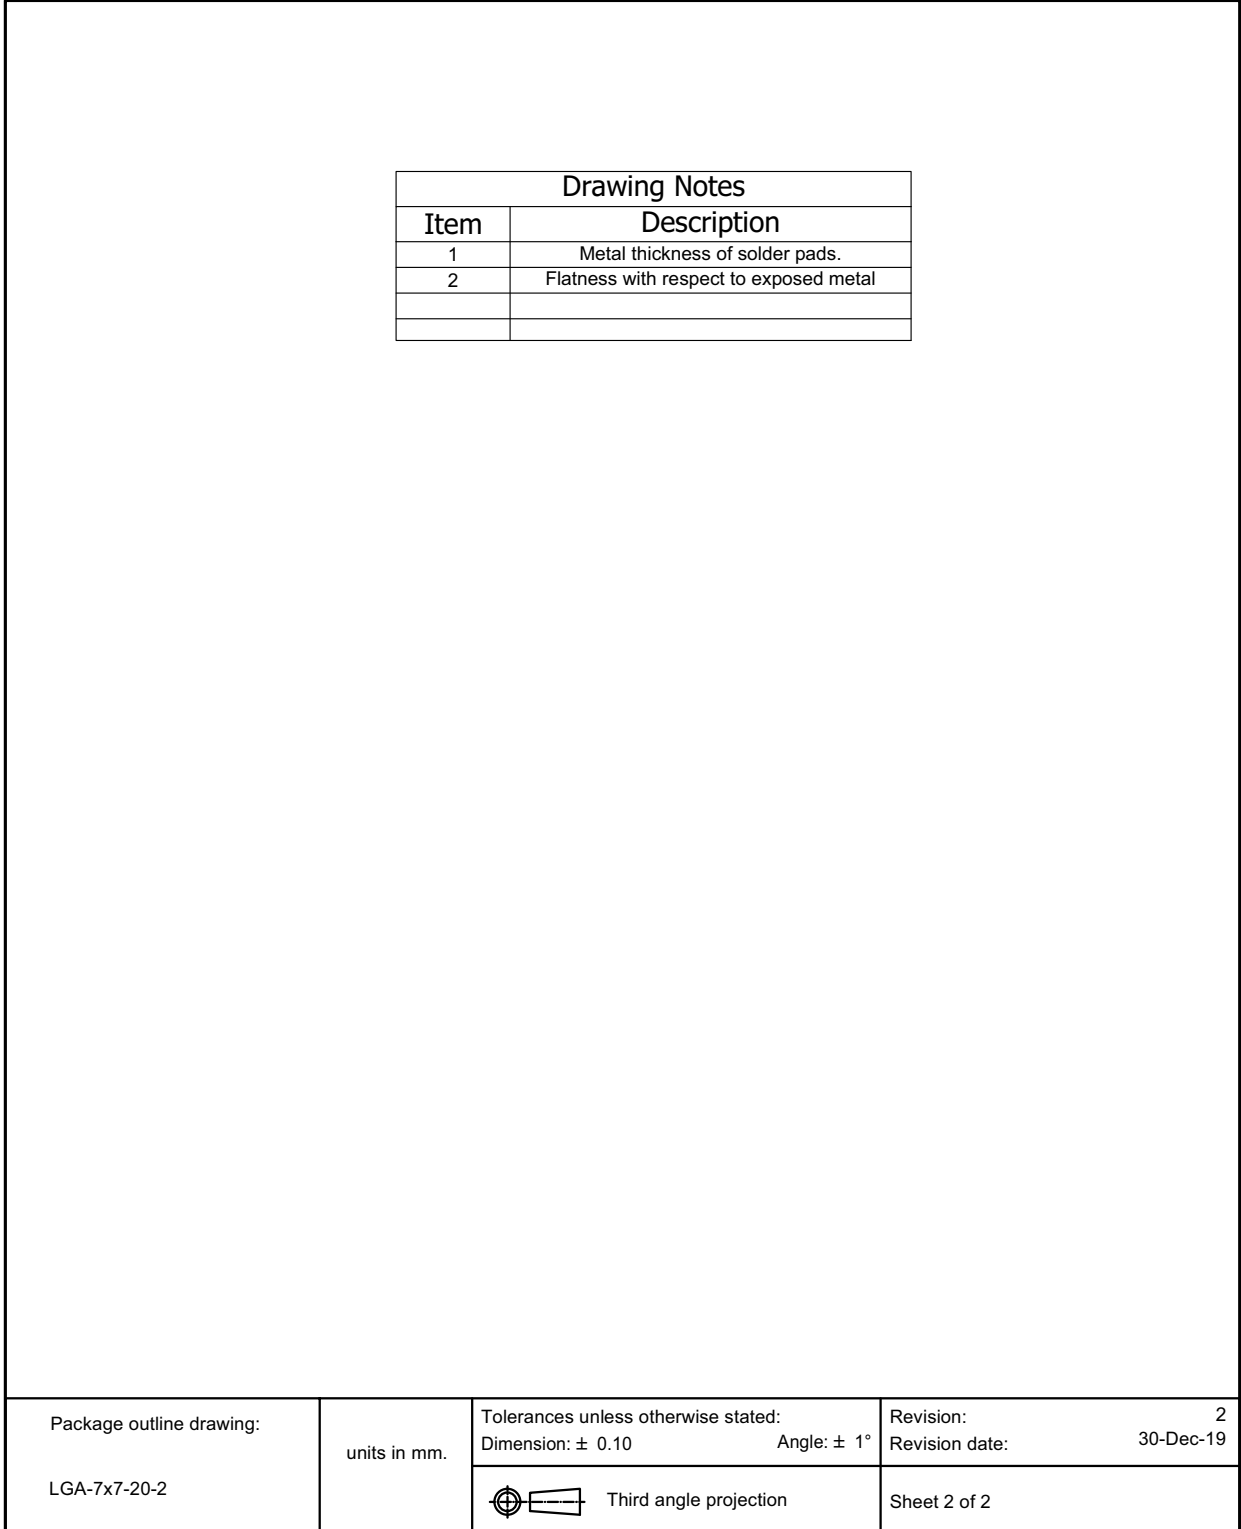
Package outline LGA-7x7-20-2 (sheet 2 of 2)
